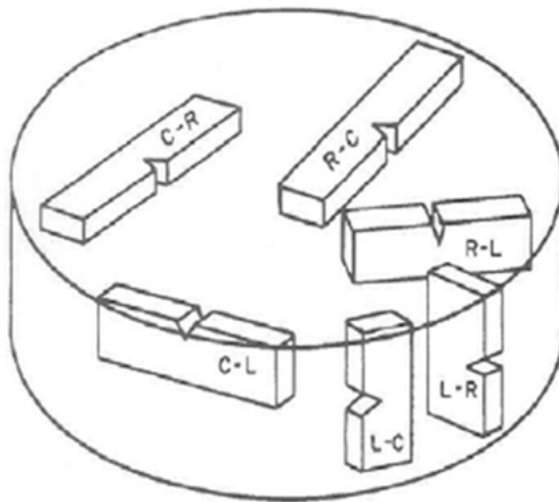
Fracture Toughness and Crack Direction II, (MIL-HDBK-5J).
